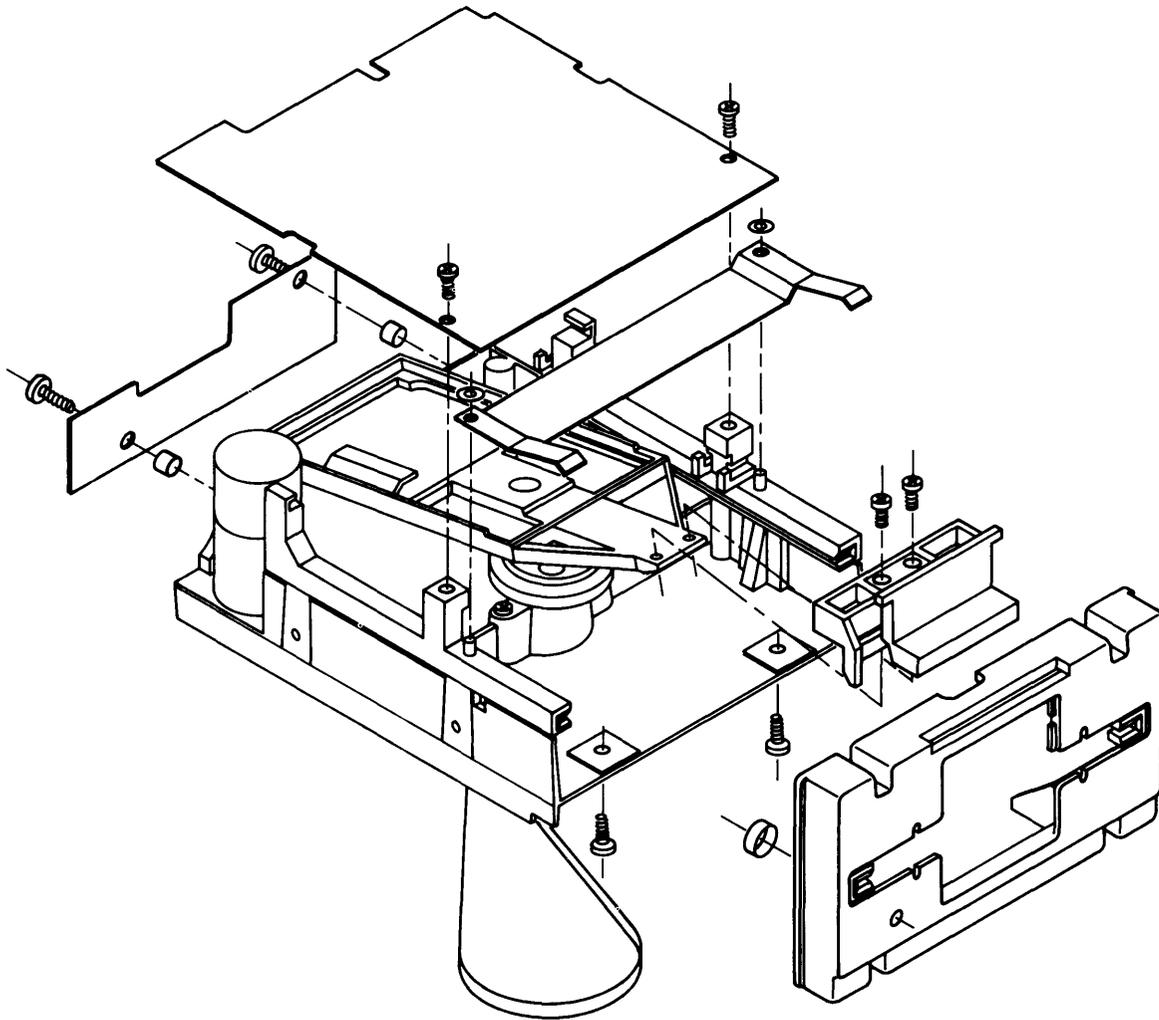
9130K Flexible Disc Drive Exploded View
